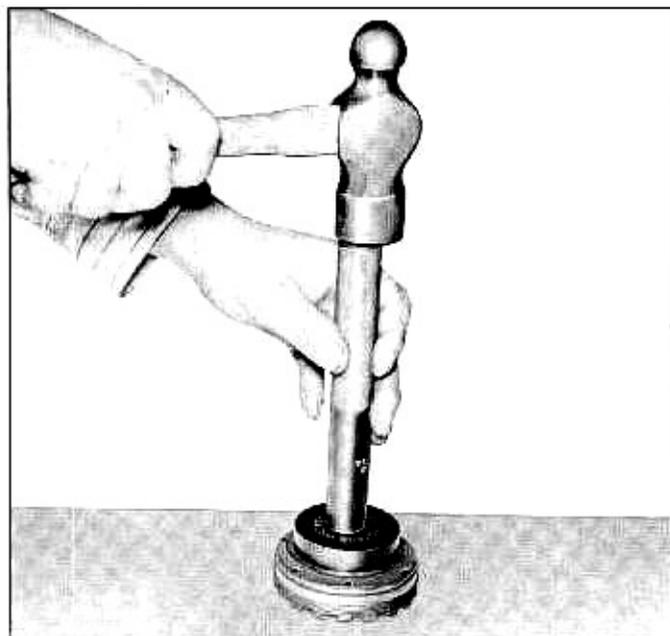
Installing Bearing Race in Pinion Adjusting Sleeve
